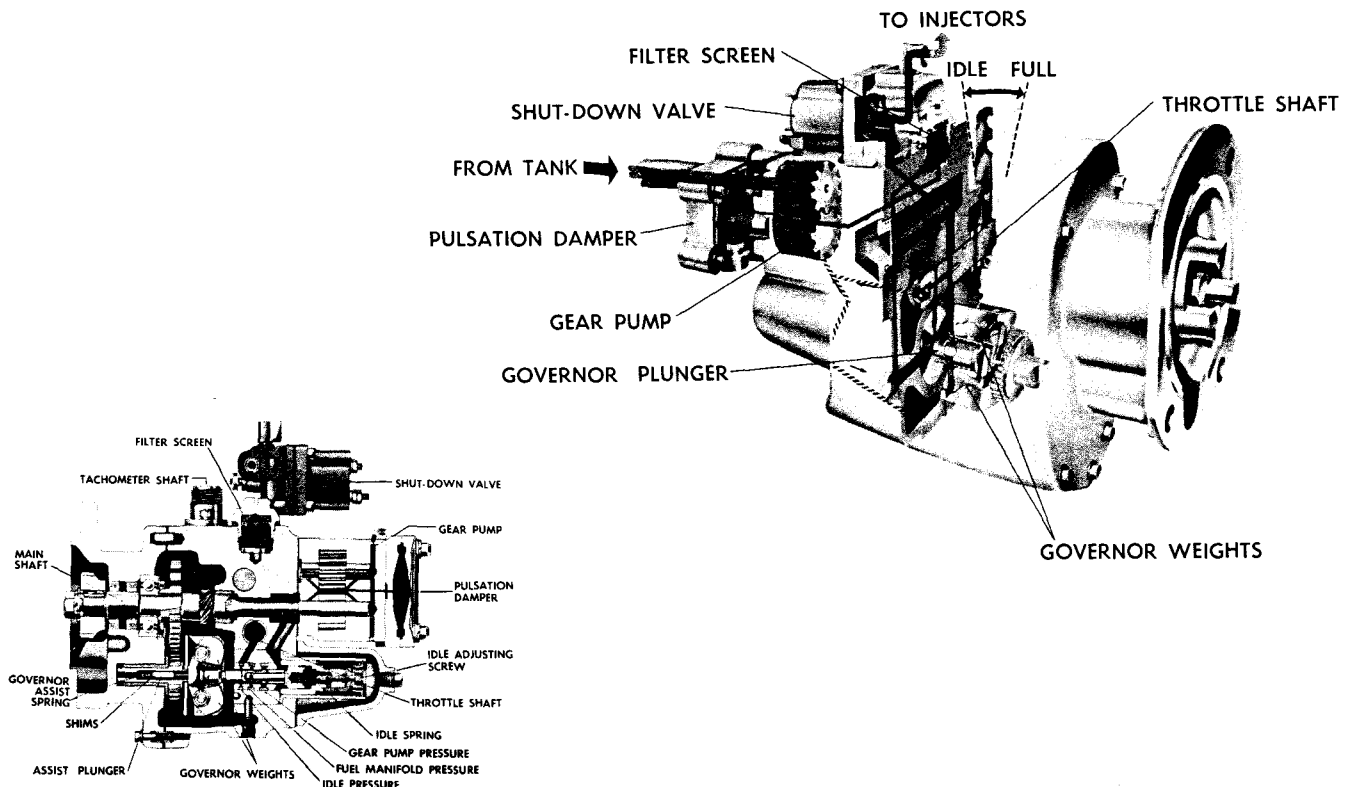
PT (type G) fuel pump cross-section and fuel flow
